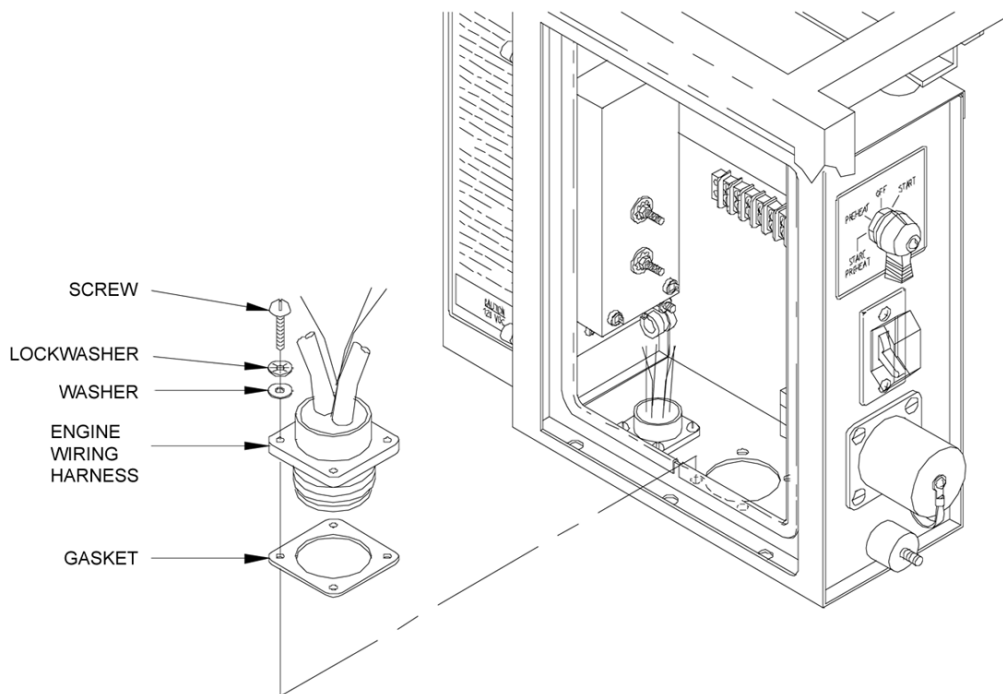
Diesel Engine Wiring Harness and Gasket, Control Panel.
